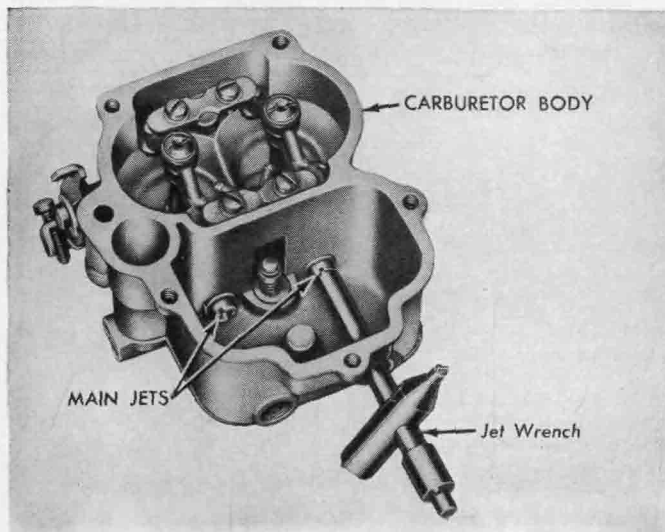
Using jet wrench to remove main jets. (*Ford Motor Company*)
